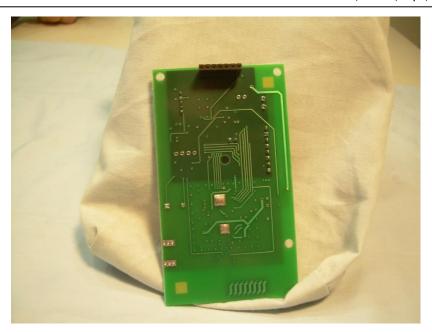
View of the Component Side of the PCB with RF Shield Removed
